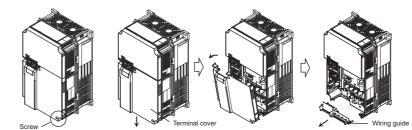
Front cover and wiring guide removal (FRN0115E3S-2G)
